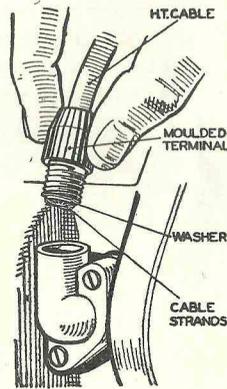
Method of Fitting Cable to High Tension Pick-up.
